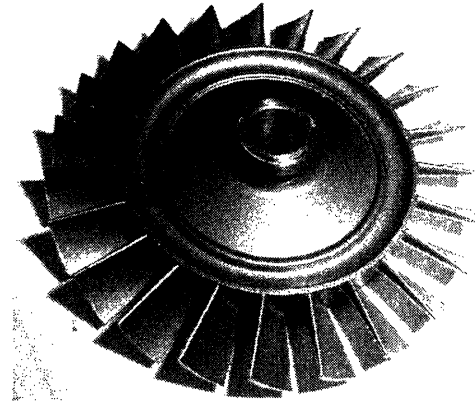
Bladed Disk Similar to a Turbine Wheel [20]
